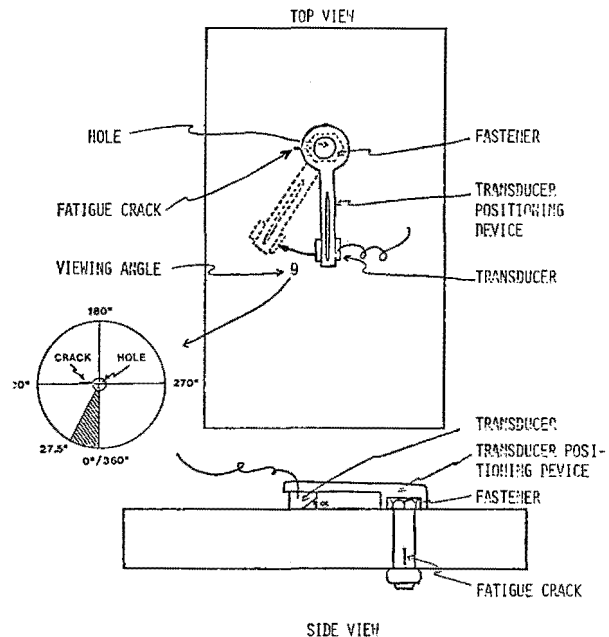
Fatigue crack ultrasonic recording equipment.
